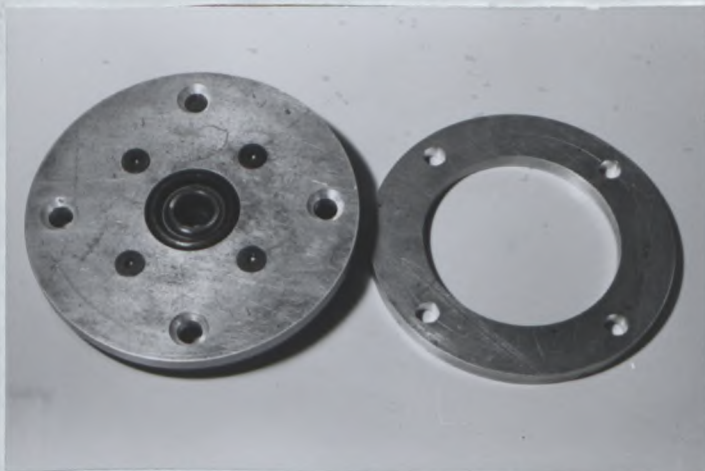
REINFORCED STRUT TOP MOUNT
